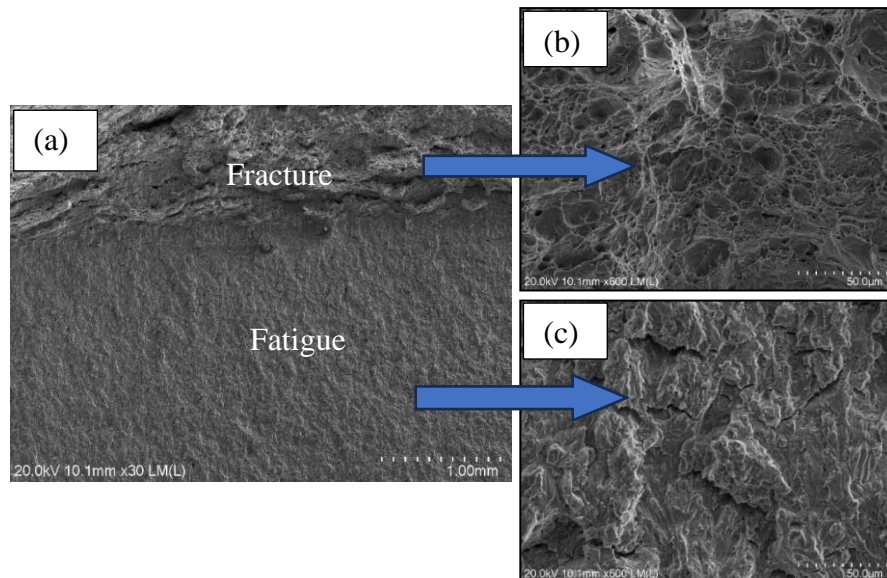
SEM image shows (a) the complete failure surface, (b) the fracture surface and (c) the fatigue surface of specimen FT-3.
